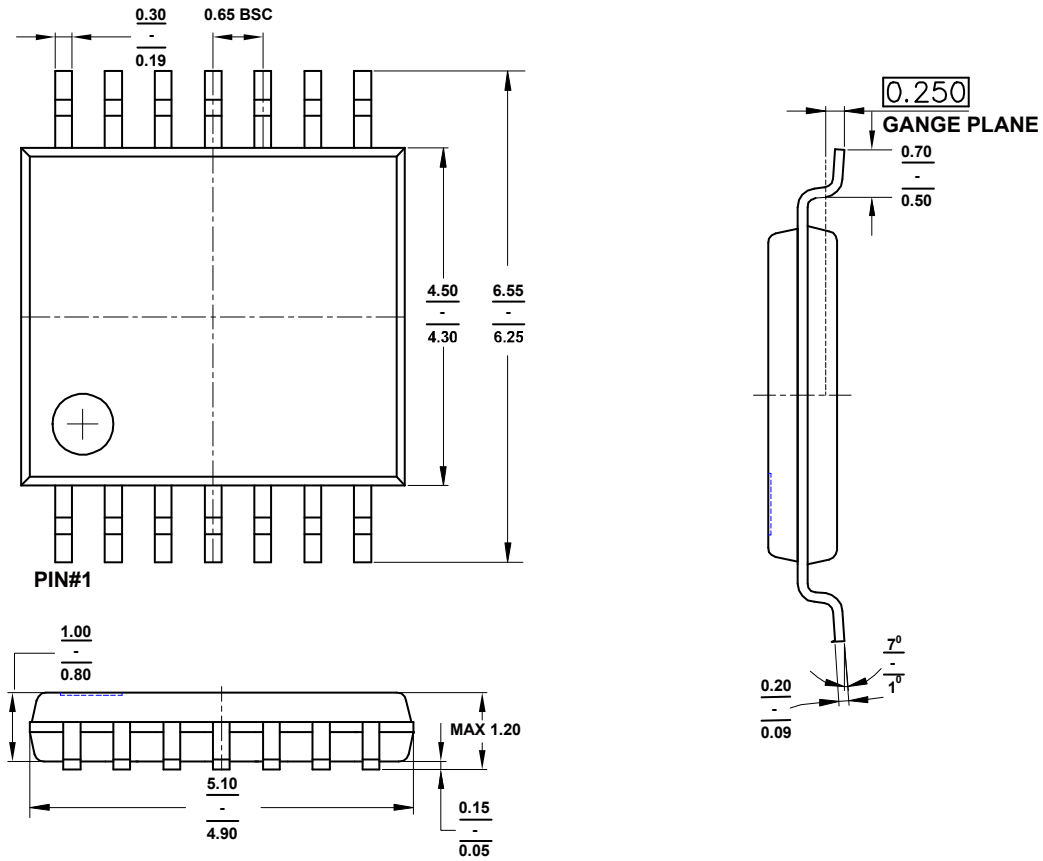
14-Lead TSSOP Package Dimensions shown in millimeters
